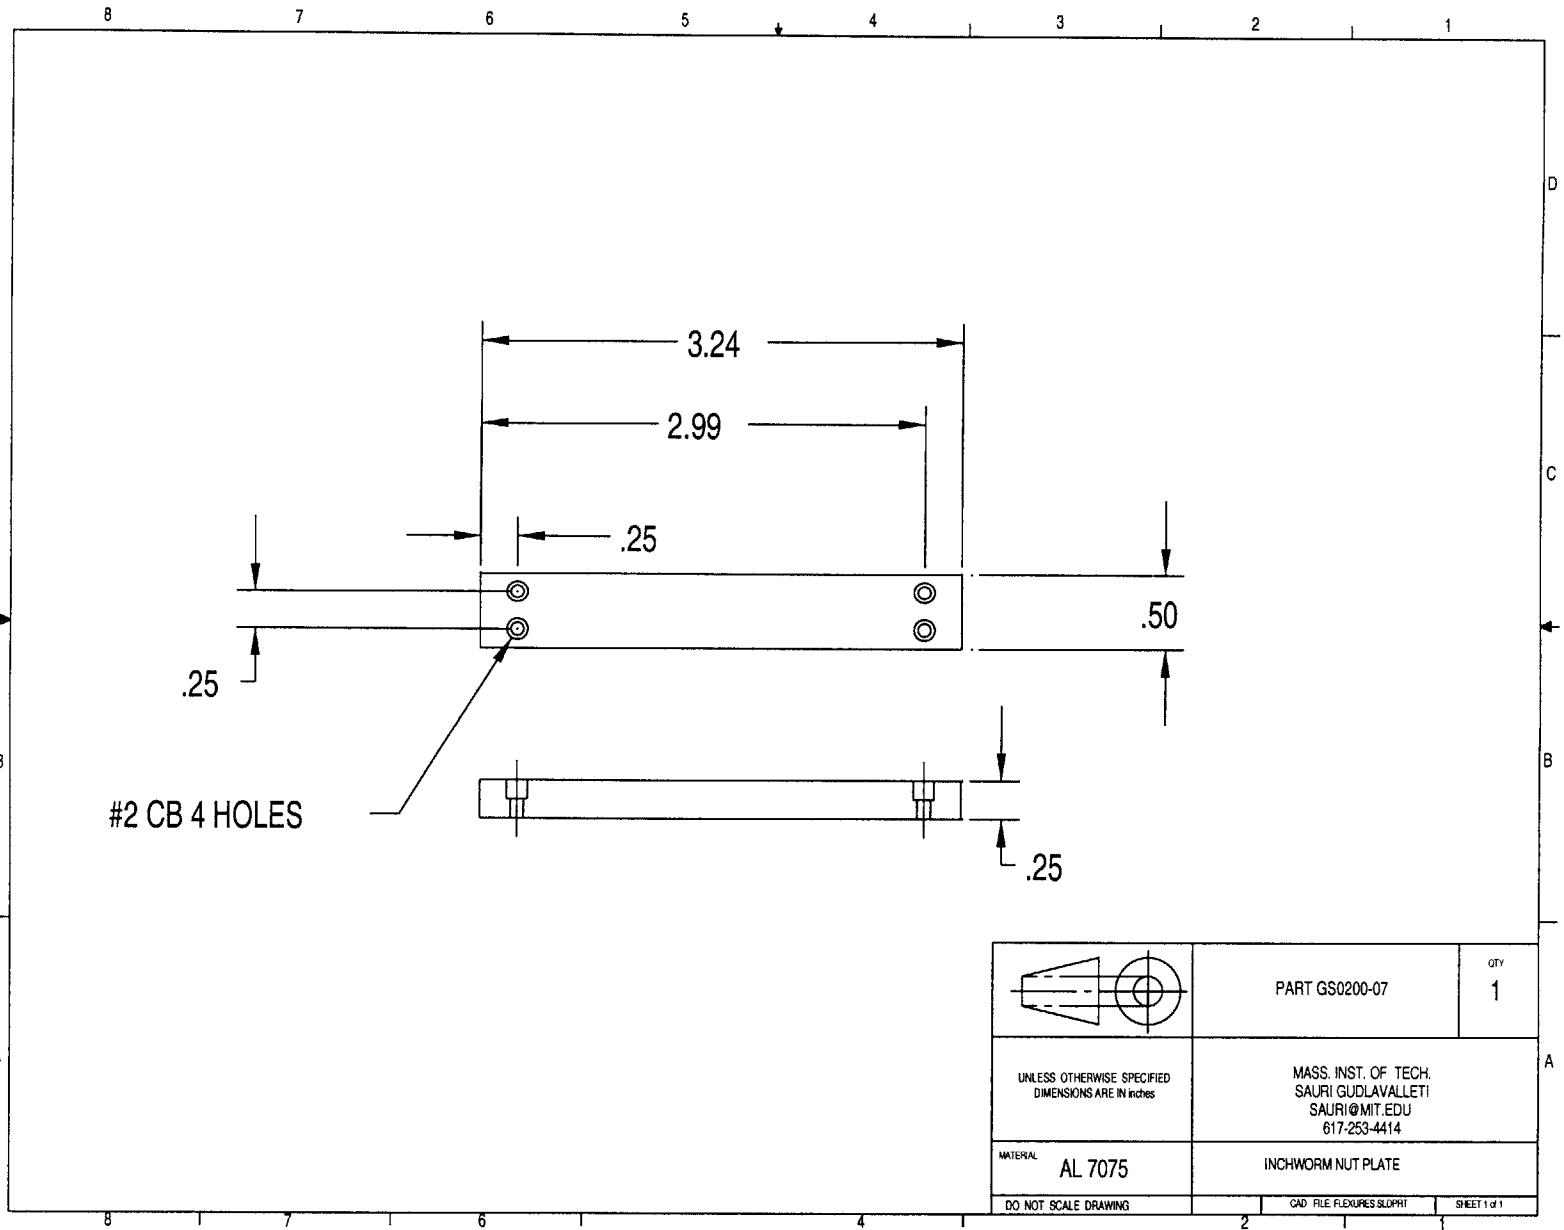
Part GS 0200-07. Nutplate for mounting inchworm.
